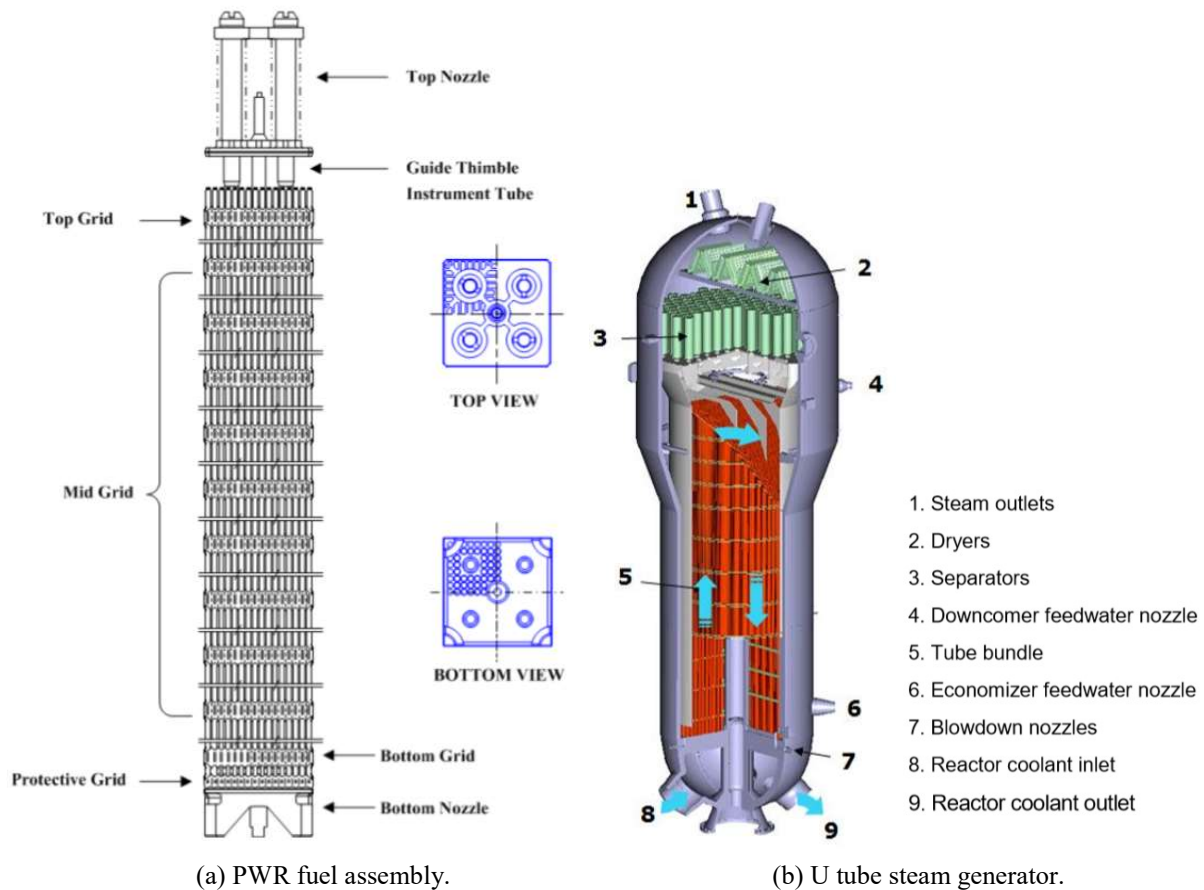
Labelled sketches of PWR (a) fuel assembly and (b) U tube steam generator [4].
